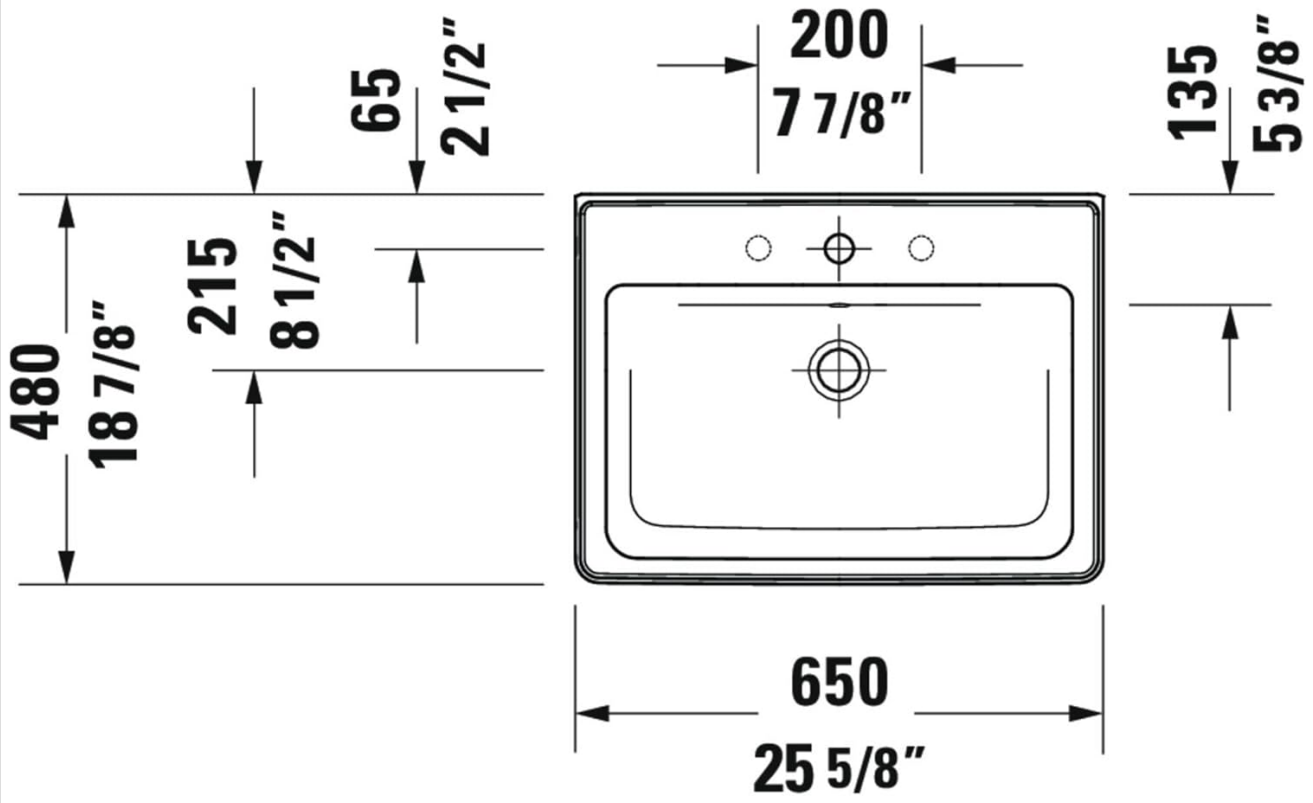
Top View Technical Drawing. This diagram illustrates the top-down dimensions of the sink, including width (650mm / 25 5/8"), depth (480mm / 18 7/8"), and faucet hole placement. All measurements are in millimeters and inches.
